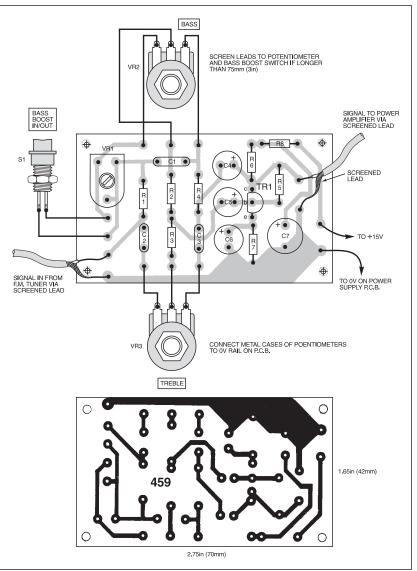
Printed circuit board component layout, wiring details and full-size copper foil master for the add-on Tone Control.
